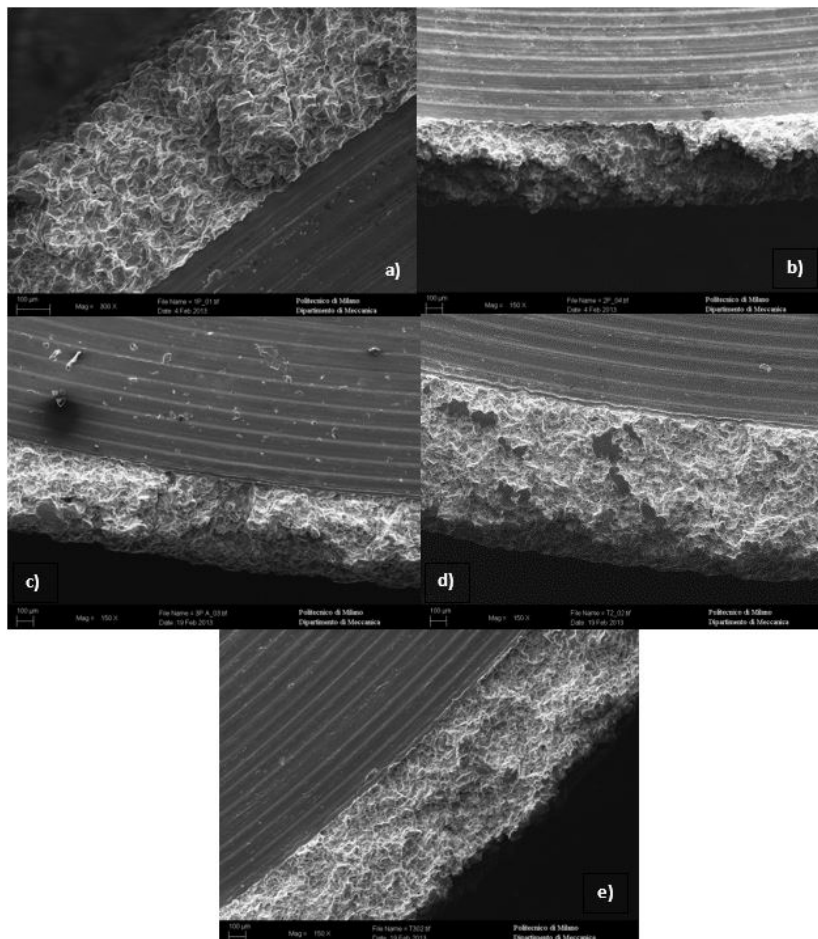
Fracture surface of tubular coating tensile test specimen. a) CS-1P, b) CS-2P, c) CS-3P d) CS-T2, e) CS-T3
